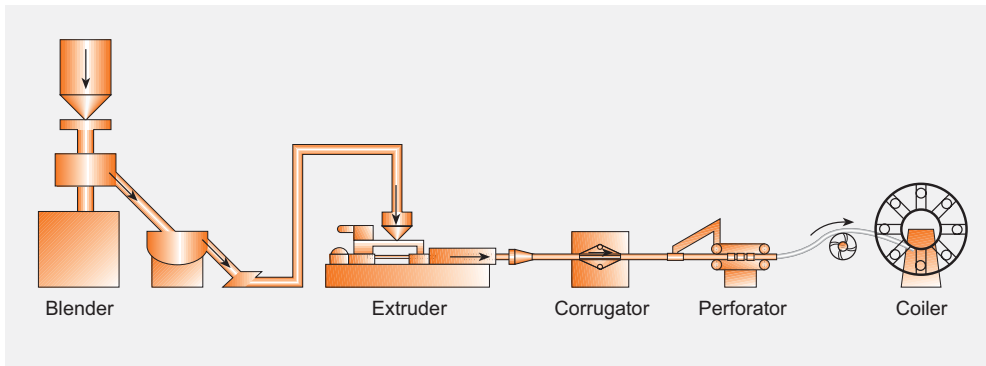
A production line for plastic pipes consists of a blender, extruder, corrugator, perforator and coiler
